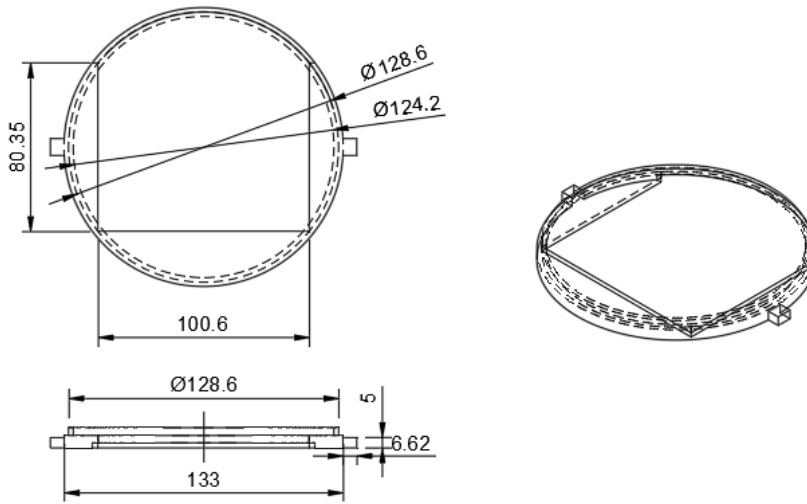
Technical drawing of top (rotating) section of board mount with raised bottom ledge that slots into circular slot of bottom section of board mount. All dimensions are given in millimeters.
